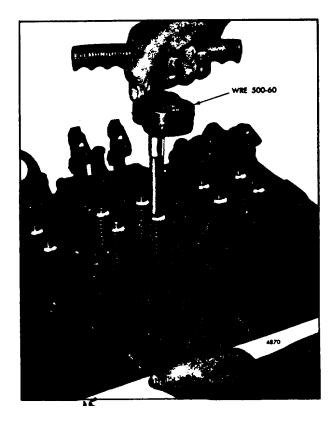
Checking Valve Opening Pressure with Gage WRE-500-60
